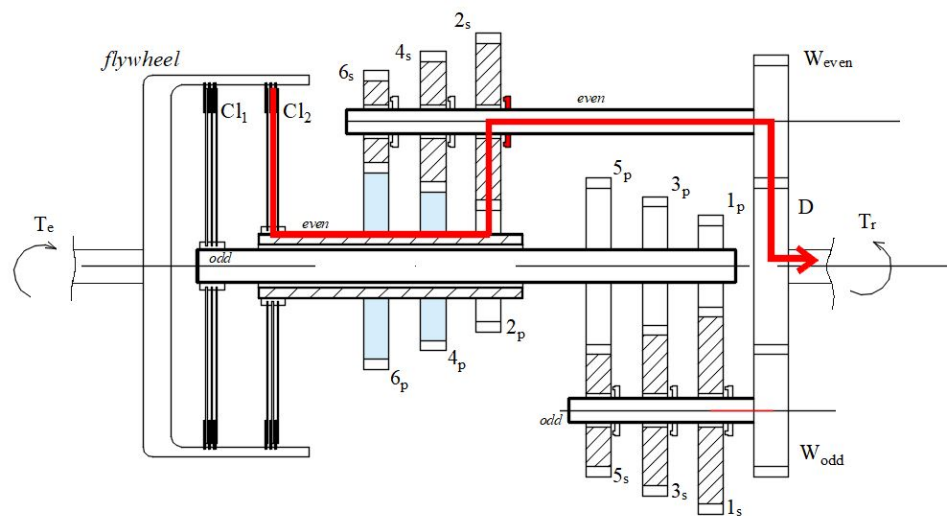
The DCT gear shifting transient: Cl_2 engaged with 2nd gear in running condition.
